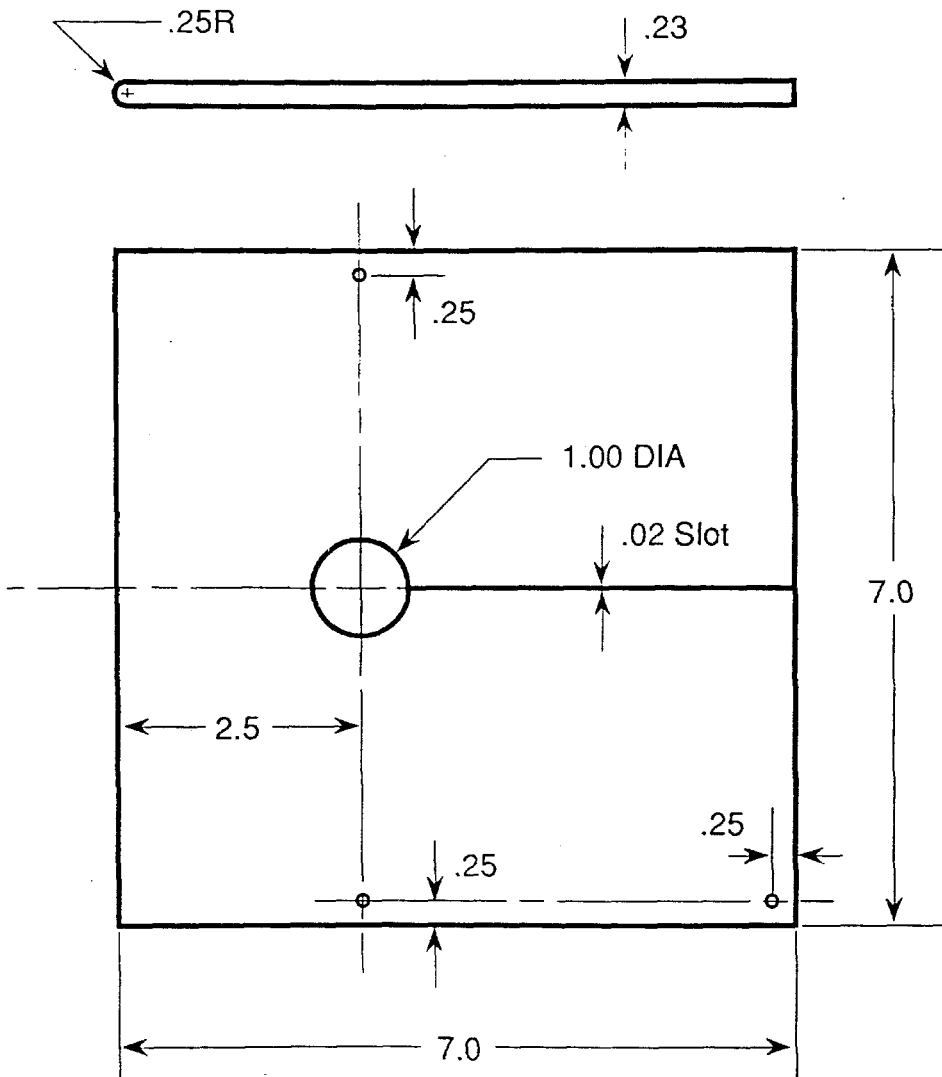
Sketch of end plate layout and the end plate leading edge profile. Dimensions are in cylinder diameters.
